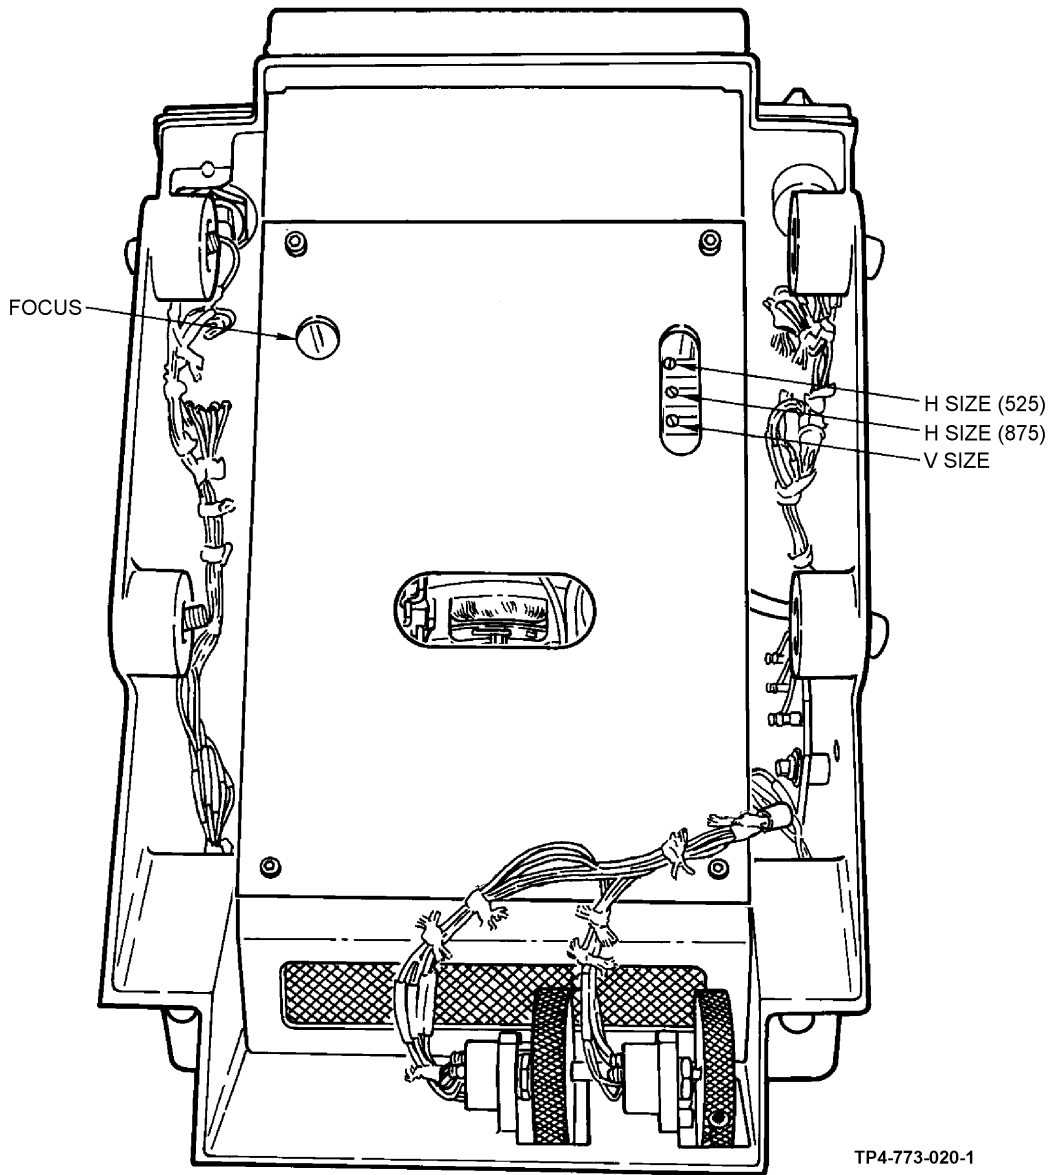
Control Panel Assembly with Adjustment Cover Installed
